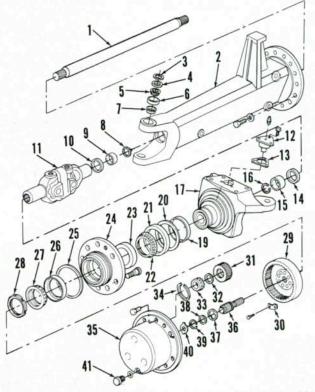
Exploded view of hub and planetary assembly used on APL-355 type front wheel drive axle. Refer to Fig. 8 for legend except for the following:
